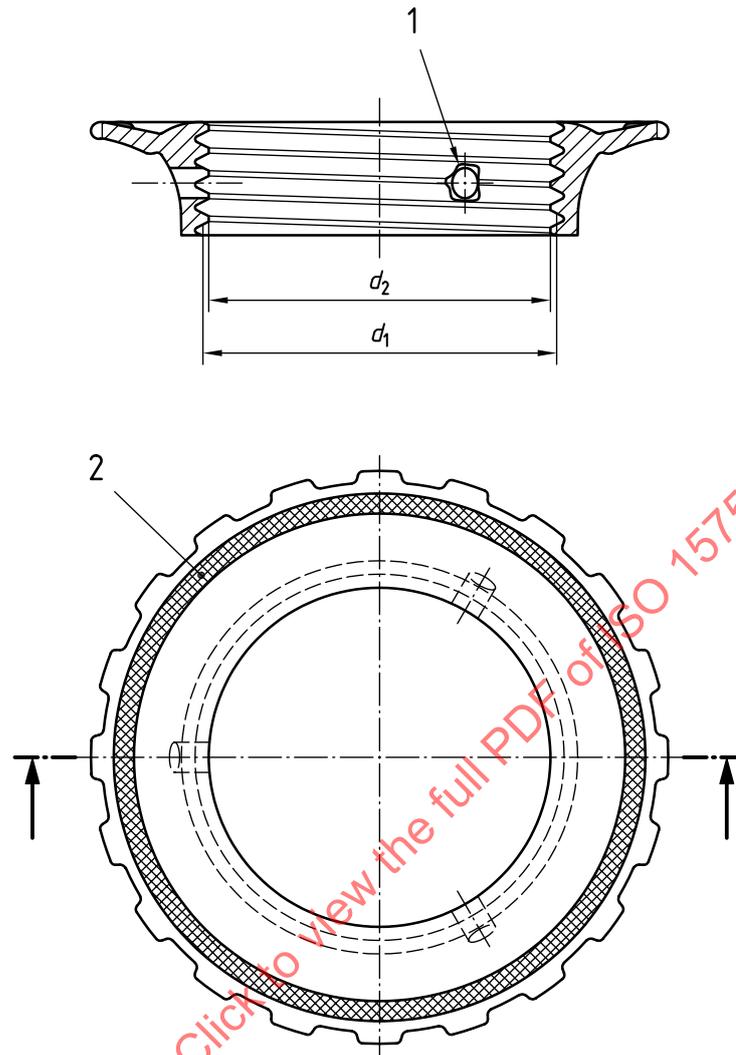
Assembly cross-section showing plastics G 2 plug
